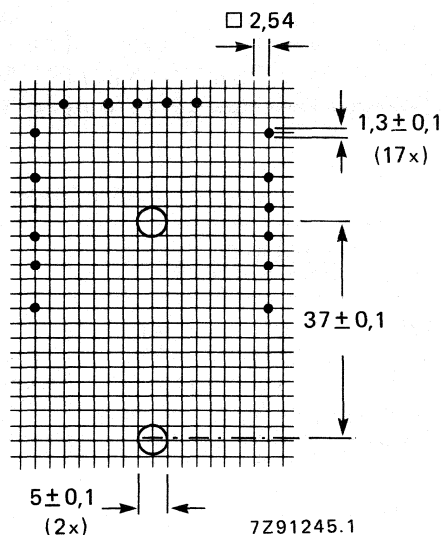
Hole pattern for mounting on a printed-wiring board (solder side).
